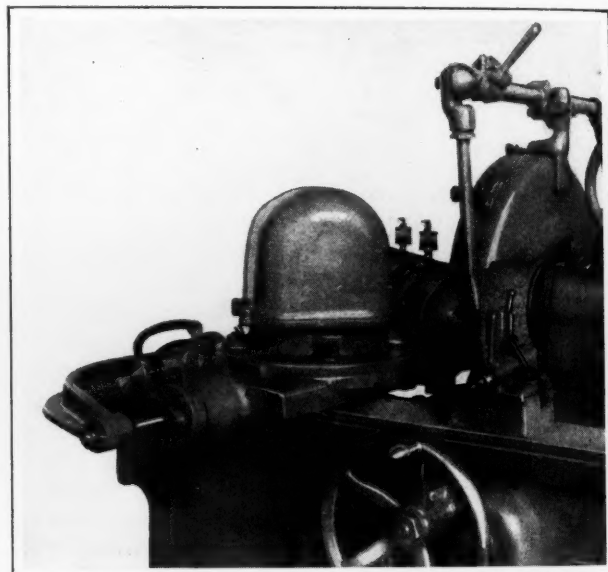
Work-head, Wheel-head and Truing Device of Landis Valve Grinder
